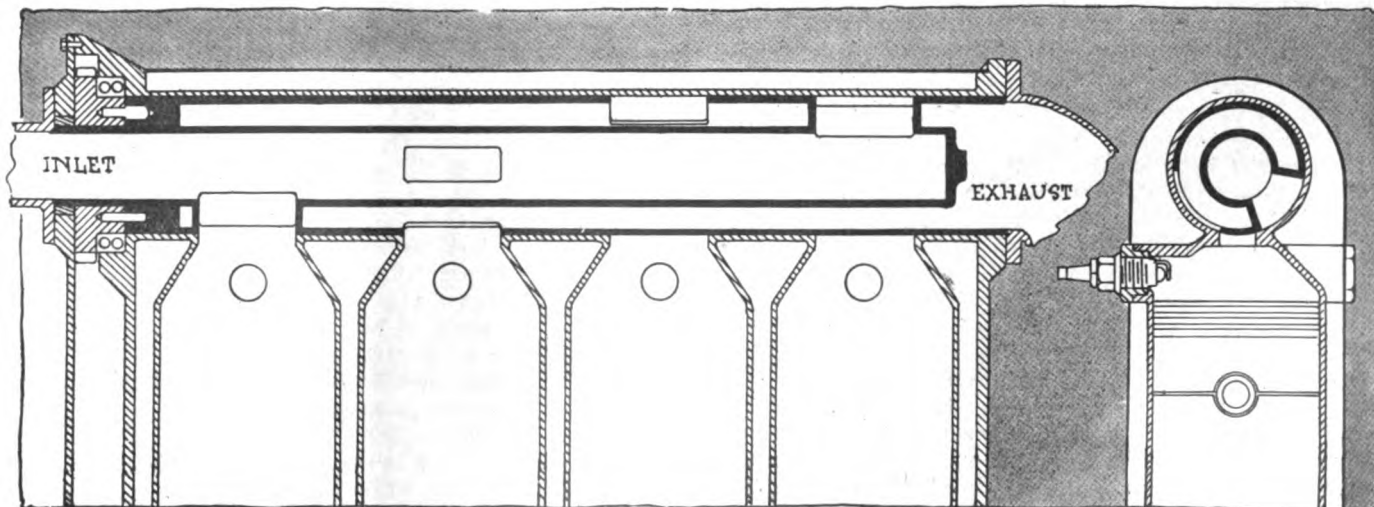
Type of rotary valve which is subject to overheating with consequent tightening within the valve seat
